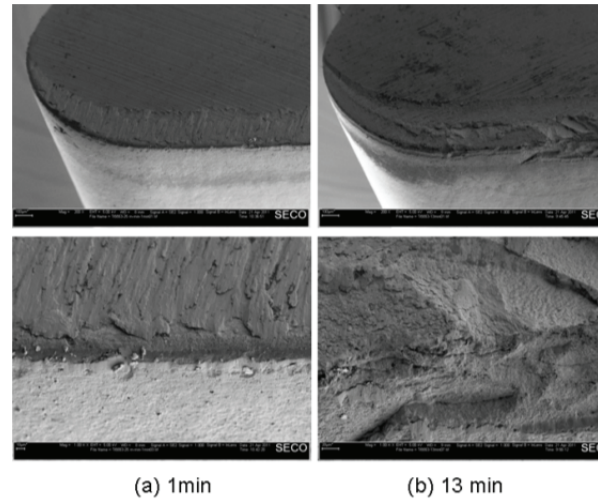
SEM view of the worn insert after milling Ti-5553 (vc=25m/min, fz=0.15 mm/tooth, ap=2 mm)
